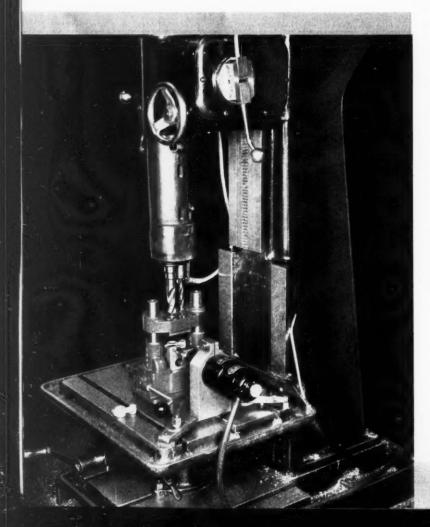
Drilling Operation in which a Special Two-spindle Head Drills Two Holes Vertically while an Electric Unit Drills Another Hole Horizontally in Small Link Forgings
